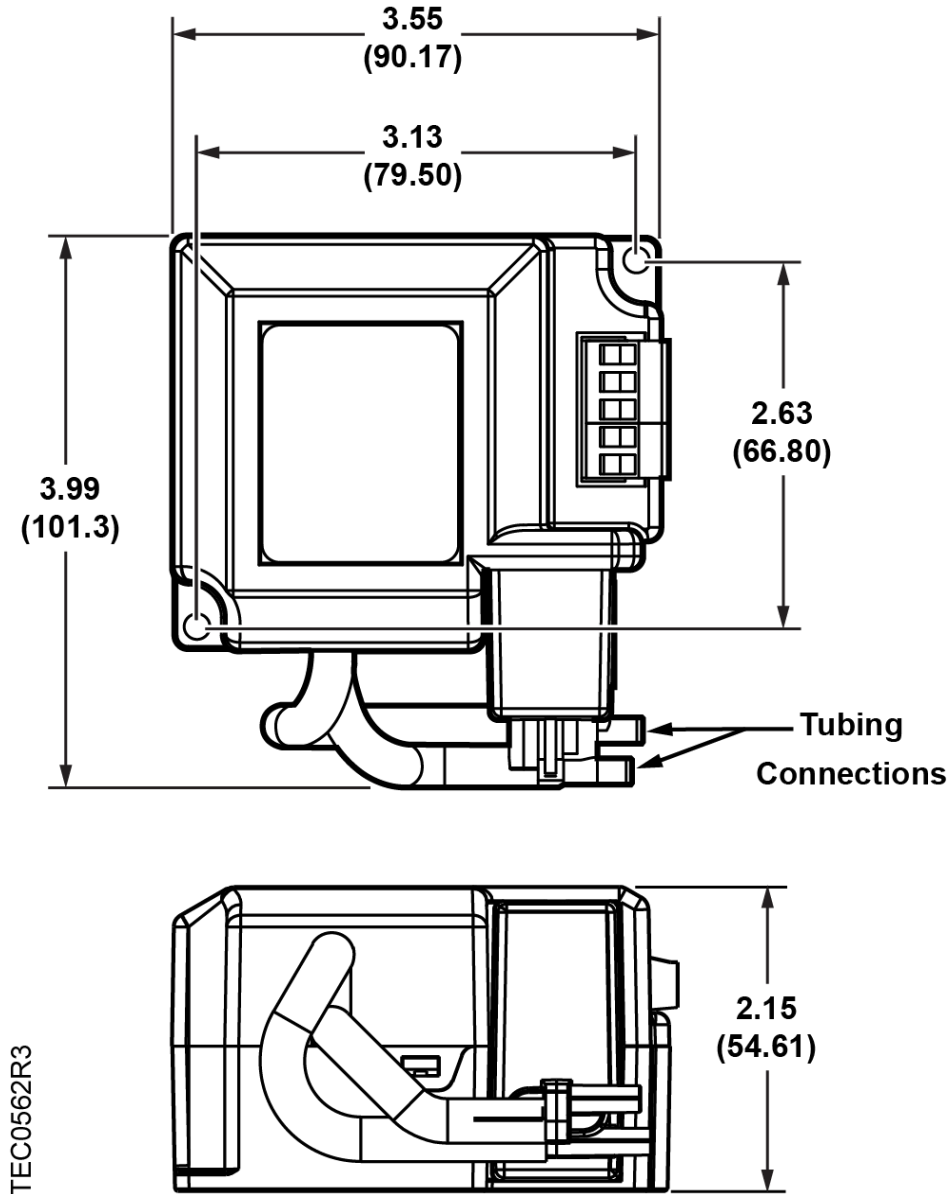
550-818B and 550-819B Dimensions in Inches (Millimeters).
